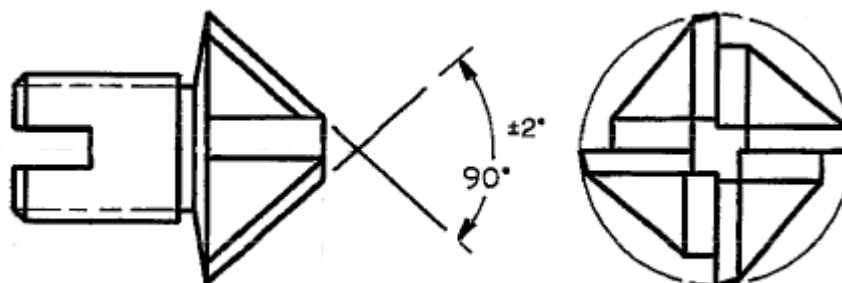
TS.561.31.14 Countersink Cutter for Edge Relief (Edge Break) of Fastener Holes
